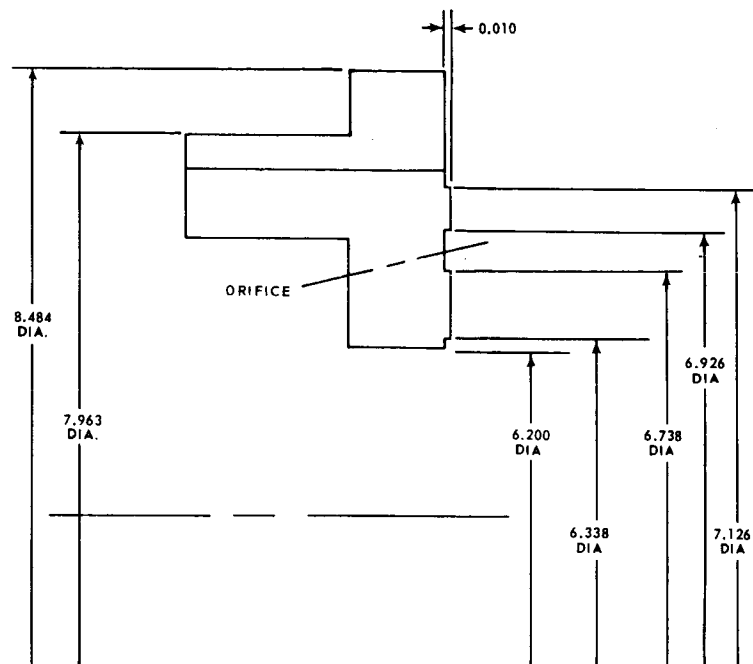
Dimensions of the Carbon Seal Lip for Build 1 of the Hybrid Seal
